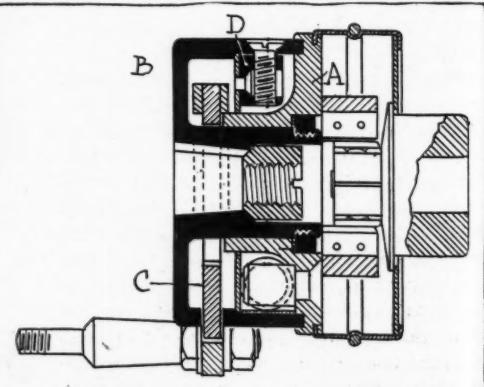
SECTION OF IMPULSE STARTER JUST BEFORE TRIGGER LETS GO
